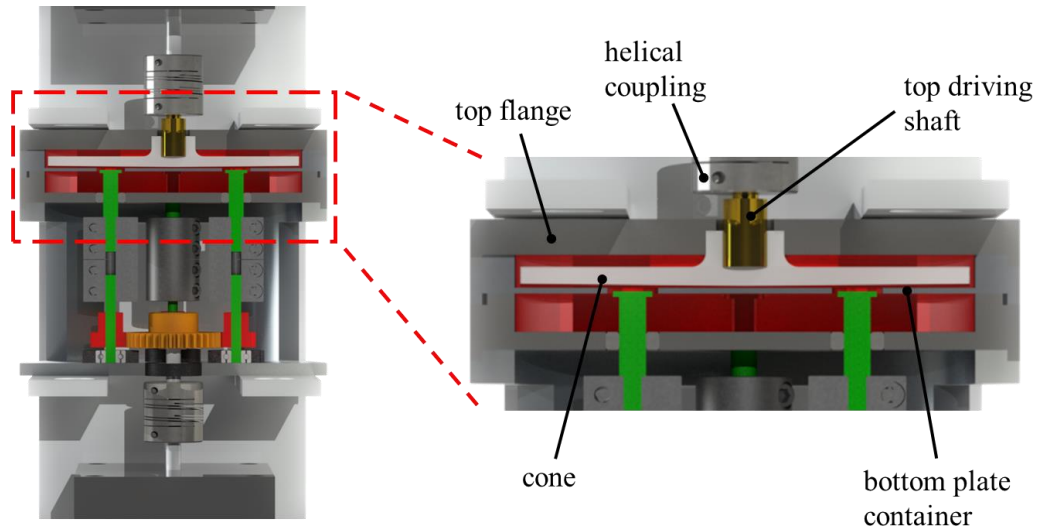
Cone assembly in cross-sectional view. Showing A.) components and their corresponding locations; B.) cone in closer view
